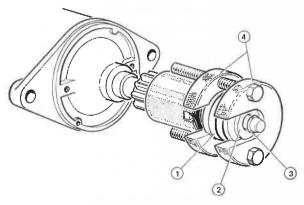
Using main spring compressing tool to dismantle later-production circlip-retained 'S' and 'SB' type drives ('SB' type illustrated)
